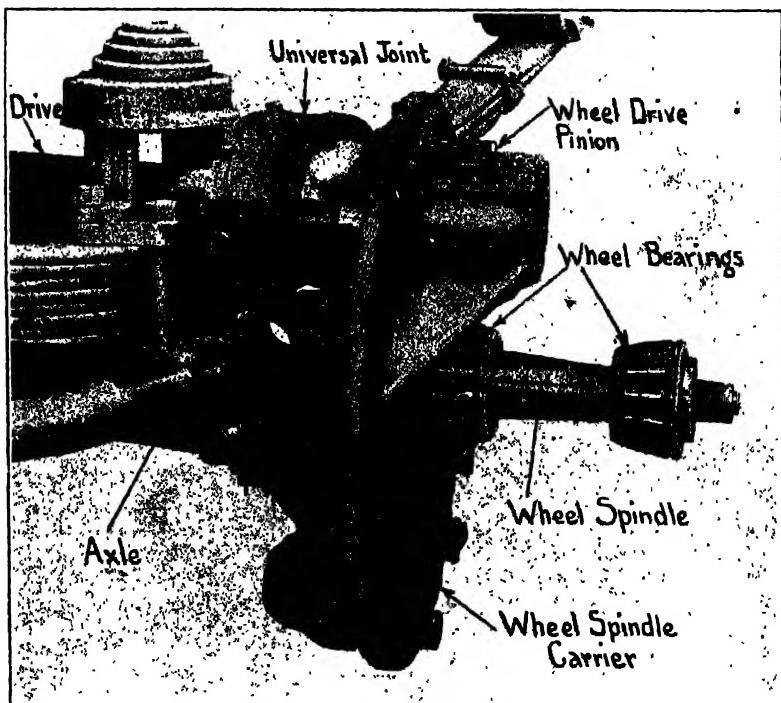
Showing Arrangement of Mobile Wheel Spindle Used on Jeffery Four Wheel Drive and Steer Truck.
